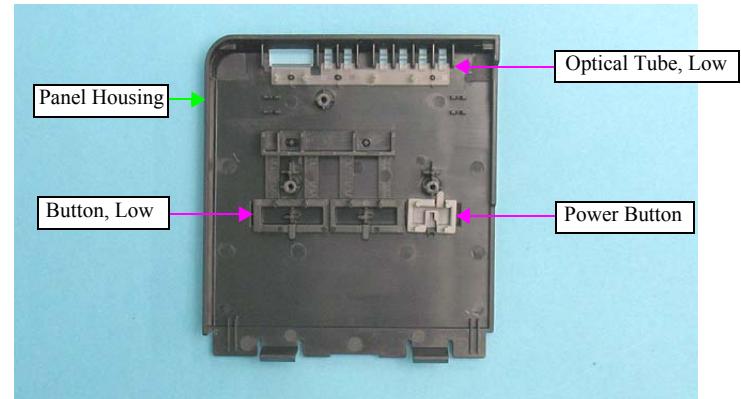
Removing the Optical Tube, Buttons (B-300/B-308)
